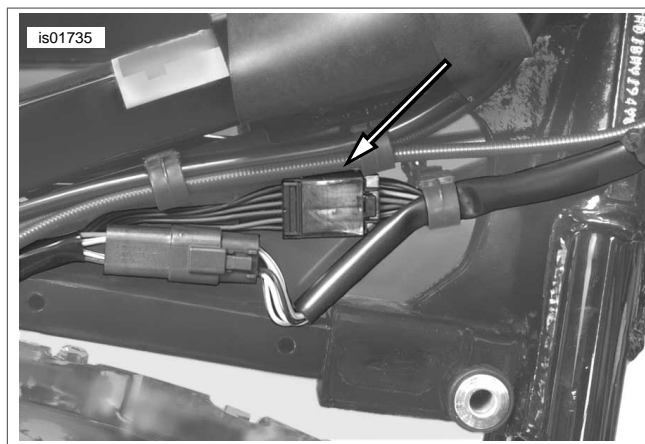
Y-Harness Assembly (4-Place Multilock)
